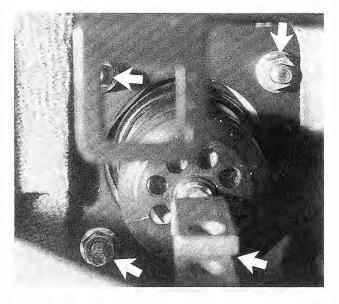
Vacuum booster mounting nuts (arrows) as viewed from inside the passenger compartment.
